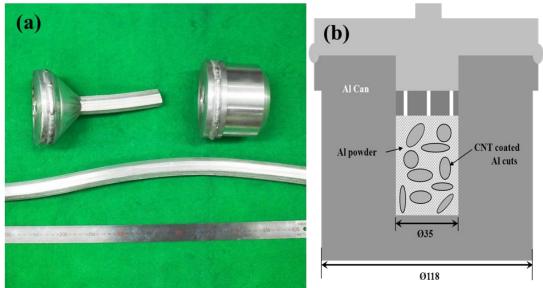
Appearance of extruded rod(a) and aluminum block before extrusion(b)
